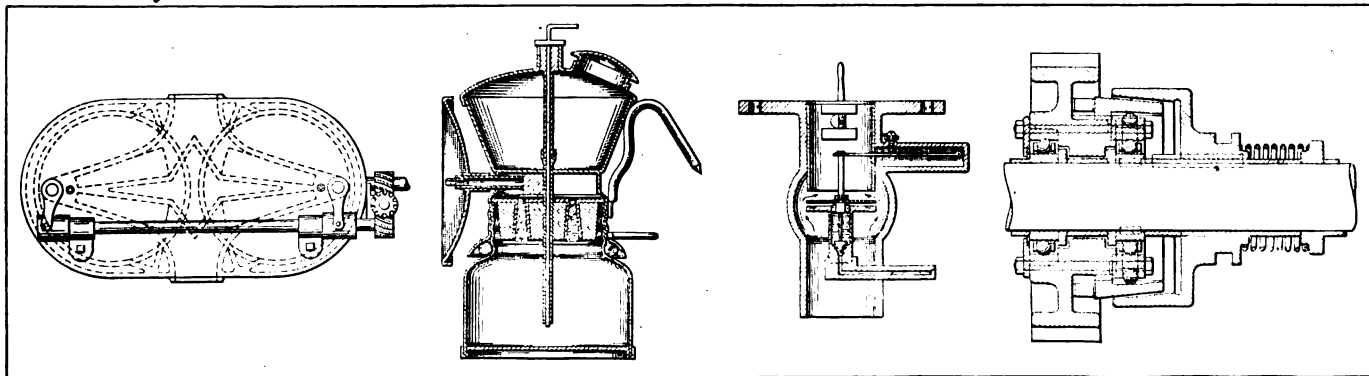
Reynolds motor. Fig. 2—Mollman acetylene light. Fig. 3—Penn clutch. Fig. 4—Rice carbureter
